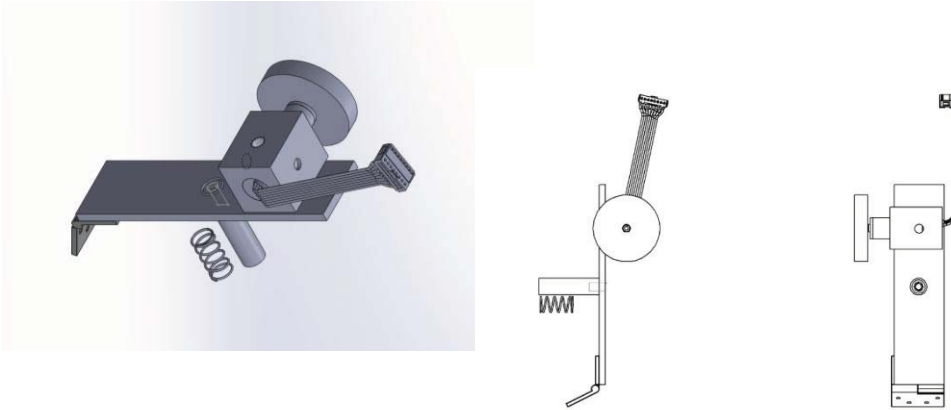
Head Motor Mount detailed CAD and detailed schematic
